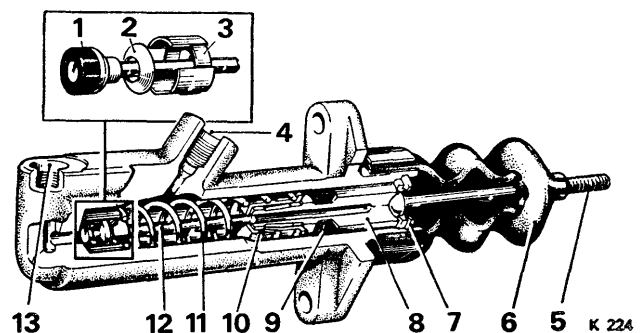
CUT-AWAY VIEW—BRAKE MASTER CYLINDER
